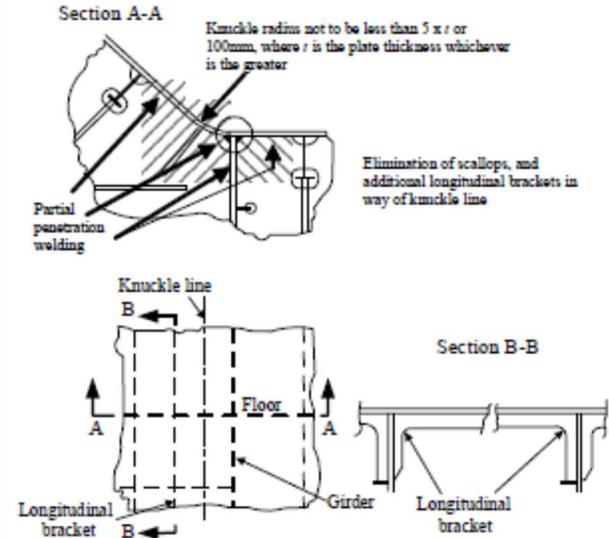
Hopper Knuckle Connection Detail, Bent Type
